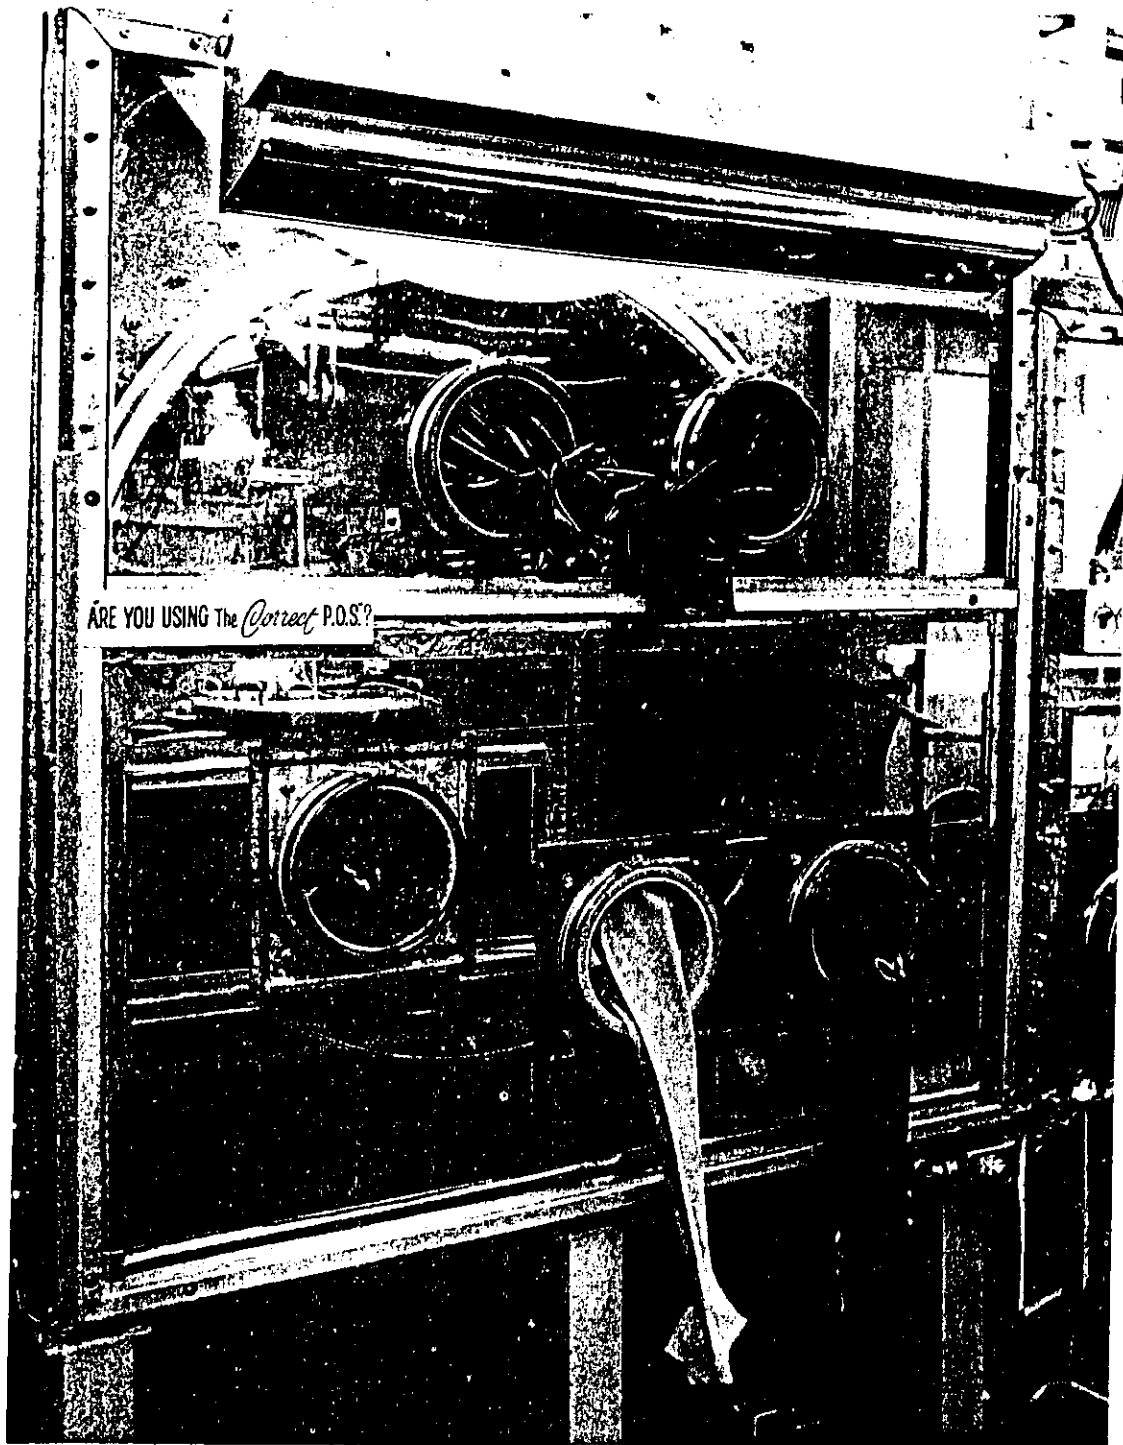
Vacuum Furnace for Casting Plutonium
